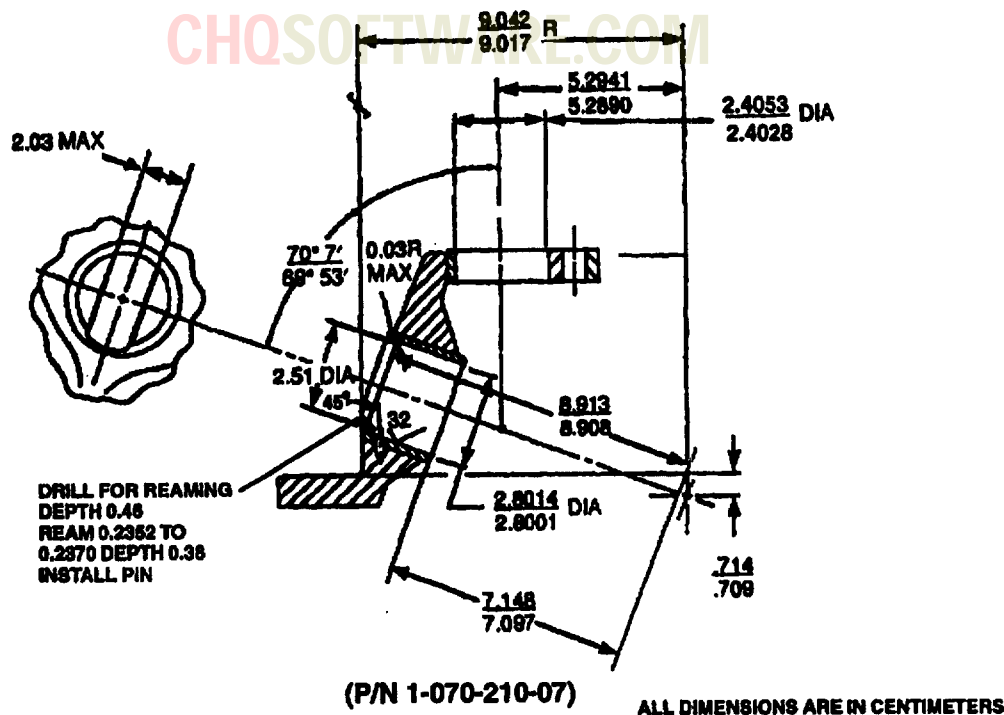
A. Accessory Drive Gear Carrier - Bearing Liner Replacement (Metric) (1-070-210-07).
